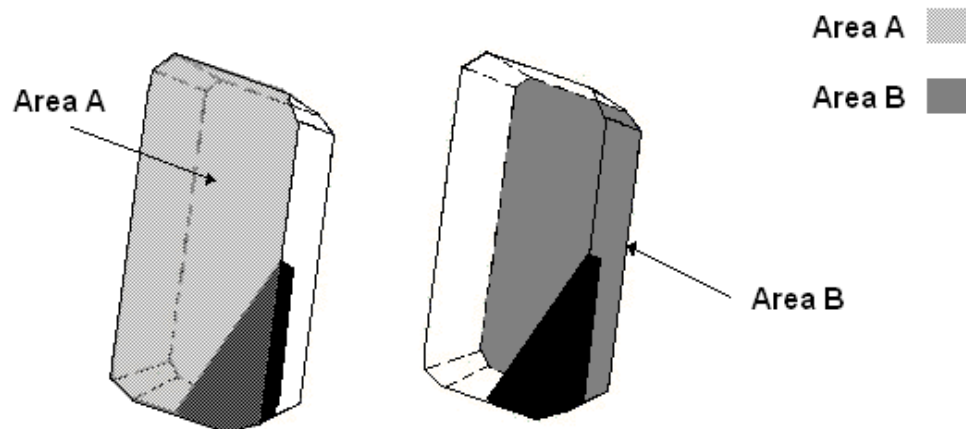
Upper and lower surfaces of the PCD work piece
